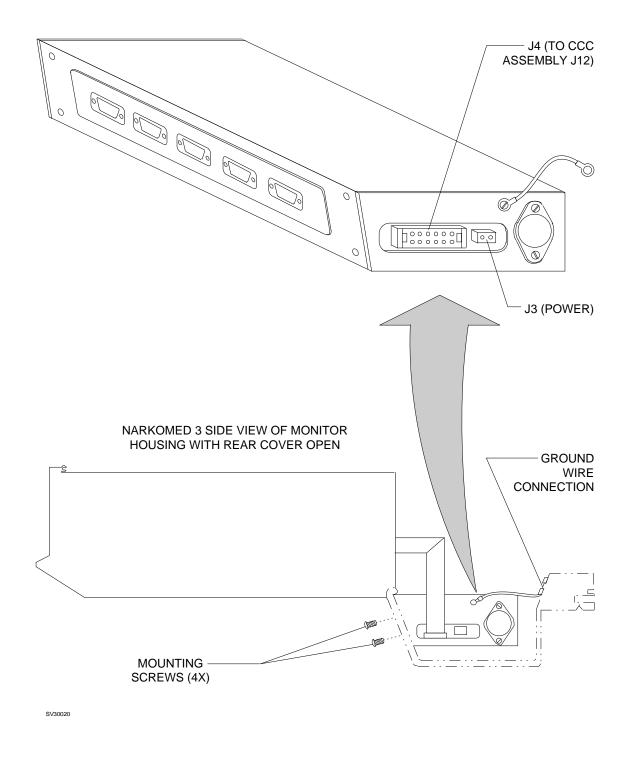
SERIAL INTERFACE ASSEMBLY MOUNTING AND CONNECTIONS
